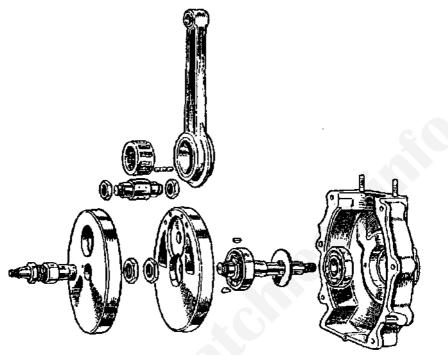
(b).—FLVWHEEL ASSEMBLY—1955-57.
